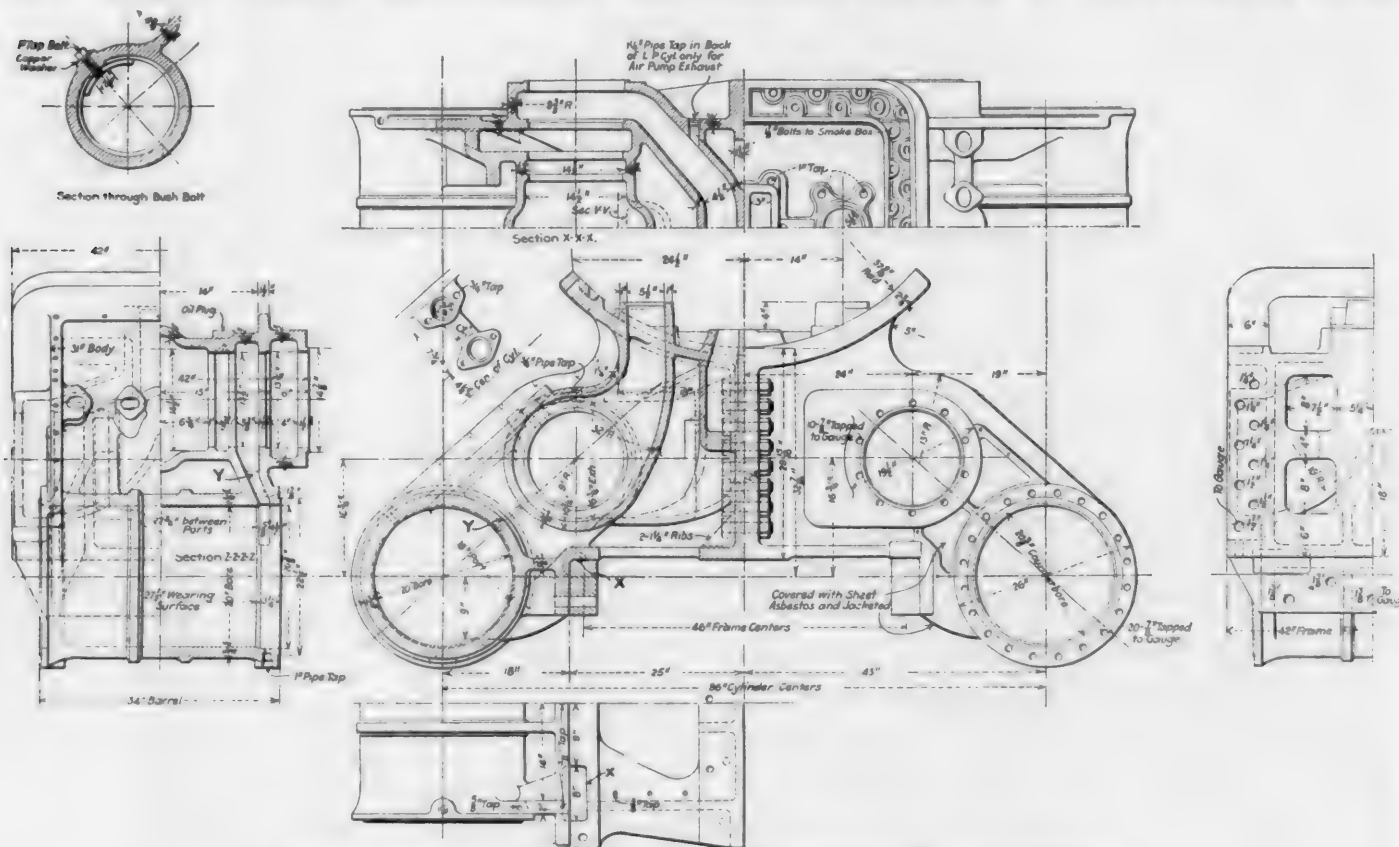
20 BY 24 IN. PISTON VALVE CYLINDER FOR CONSOLIDATION LOCOMOTIVE.
